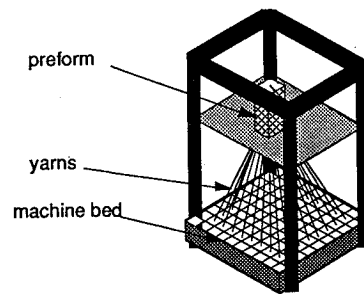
Schematic of a three-dimensional Cartesian braiding machine.
